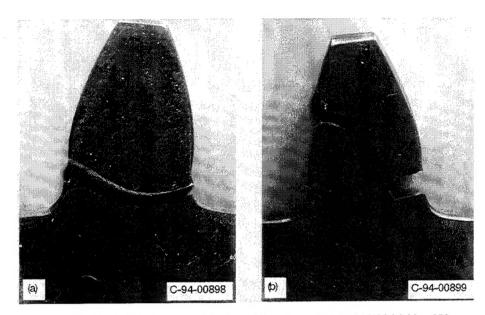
Typical tooth fractures for two of the gear materials. (a) VASCO Max 350. (b) VASCO Matrix ${\rm I\!I}$.
